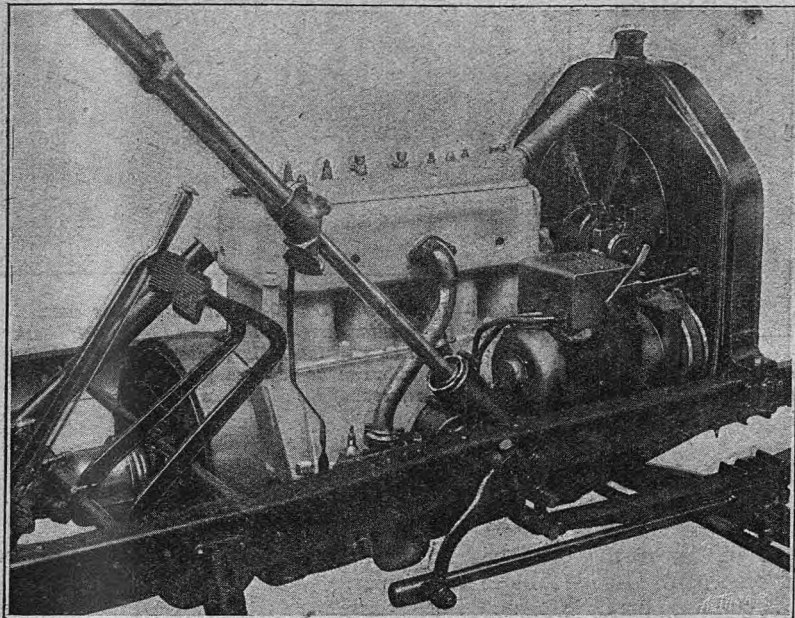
Offside view of the 20-25 h.p. Studebaker engine, showing the engine starting and car lighting dynamo, the magneto, top of the carburettor, steering gear, and other details.
